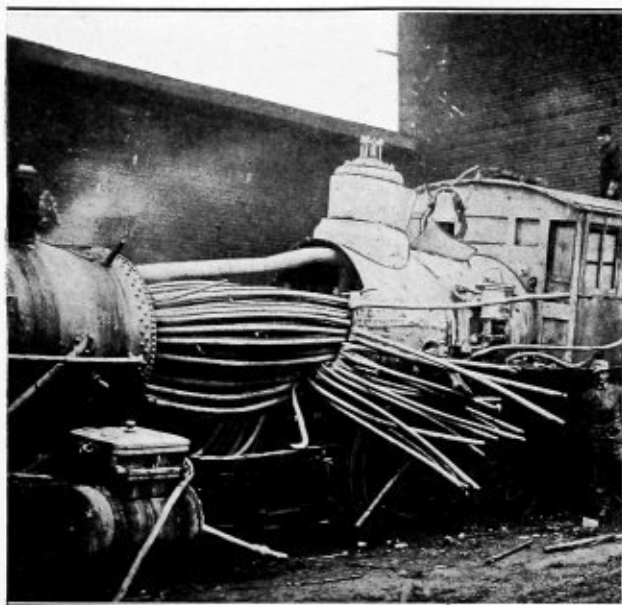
EXPLOSION CAUSED BY EXCESSIVE PRESSURE ON DEFECTIVE SHELL
